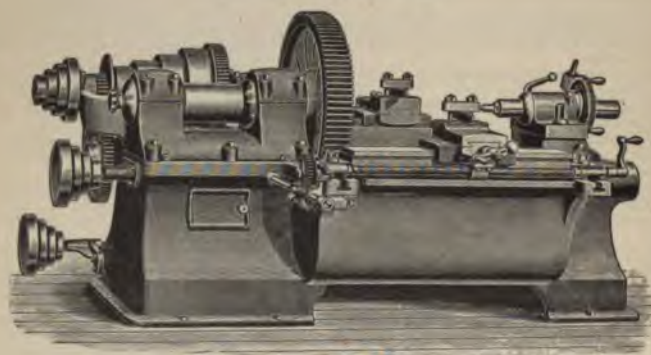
SHOWS 50" LATHE WITH BORING ATTACHMENT
